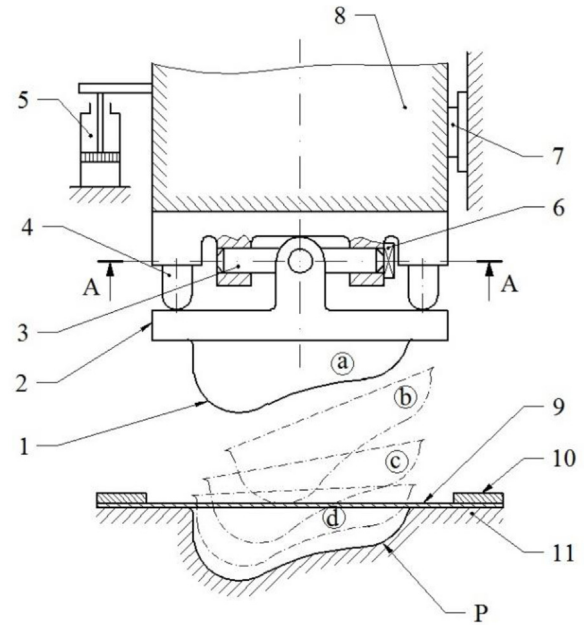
Scheme of the new design die for sheet deep drawing [8,13].
